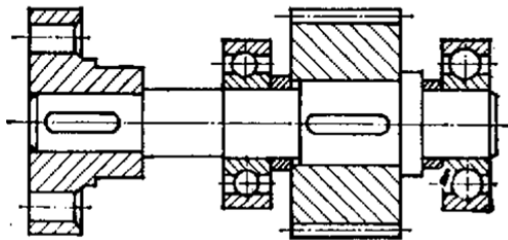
Stepped shaft (<http://www.nly.cn/zhou0.htm>) [15 May 2012]
